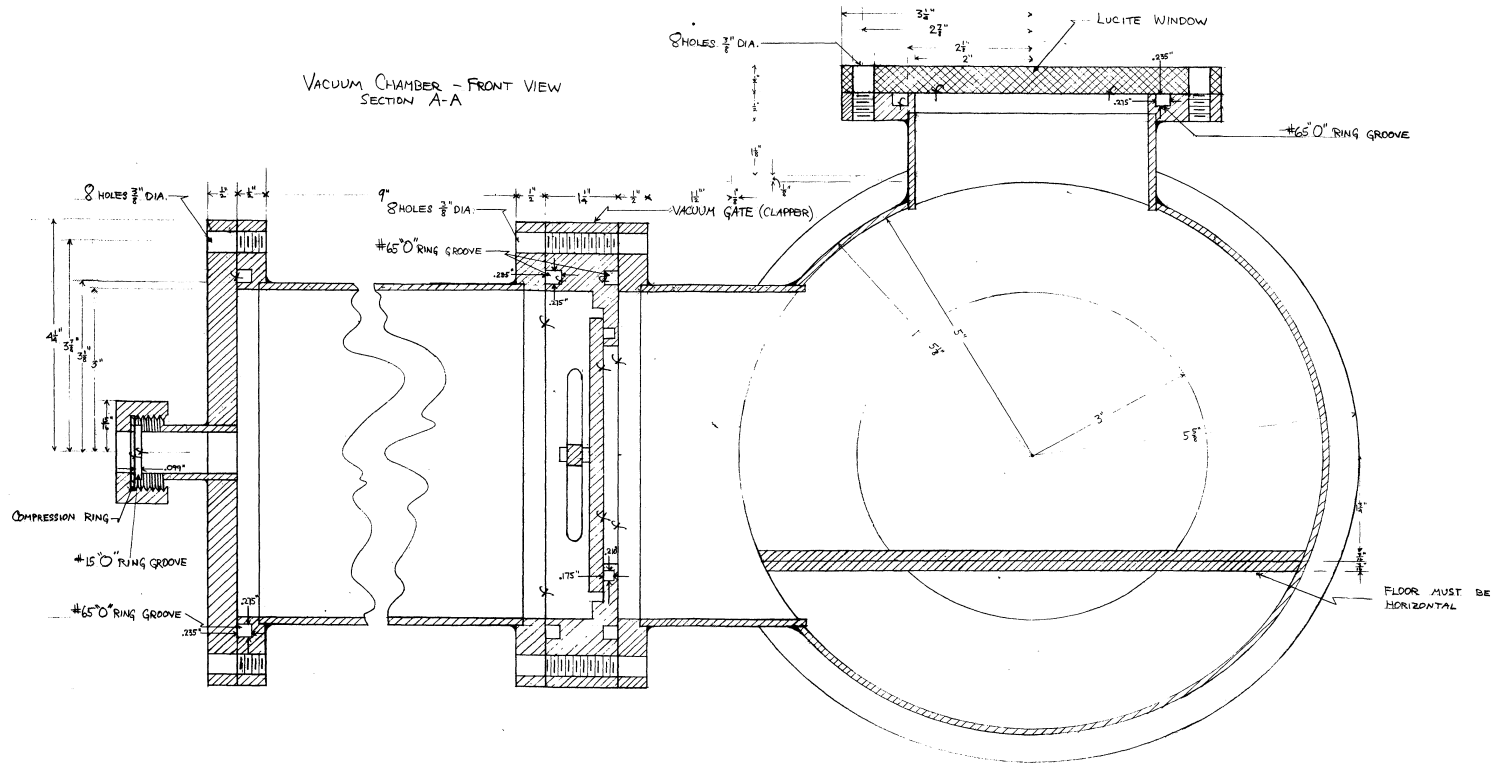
Machine drawing of the cyclotron bombardment chamber - front view.
